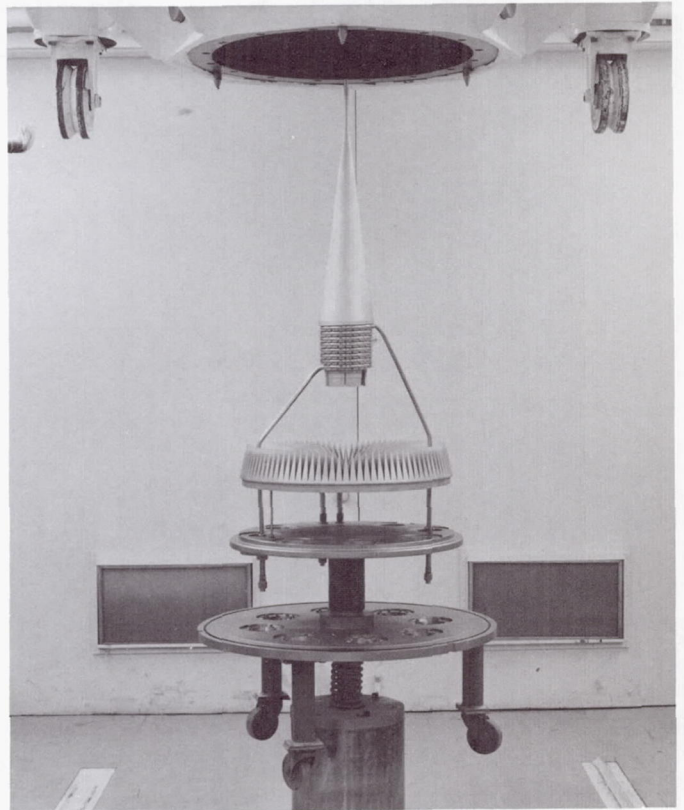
Partly assembled double door with electron-beam gun cone in place
